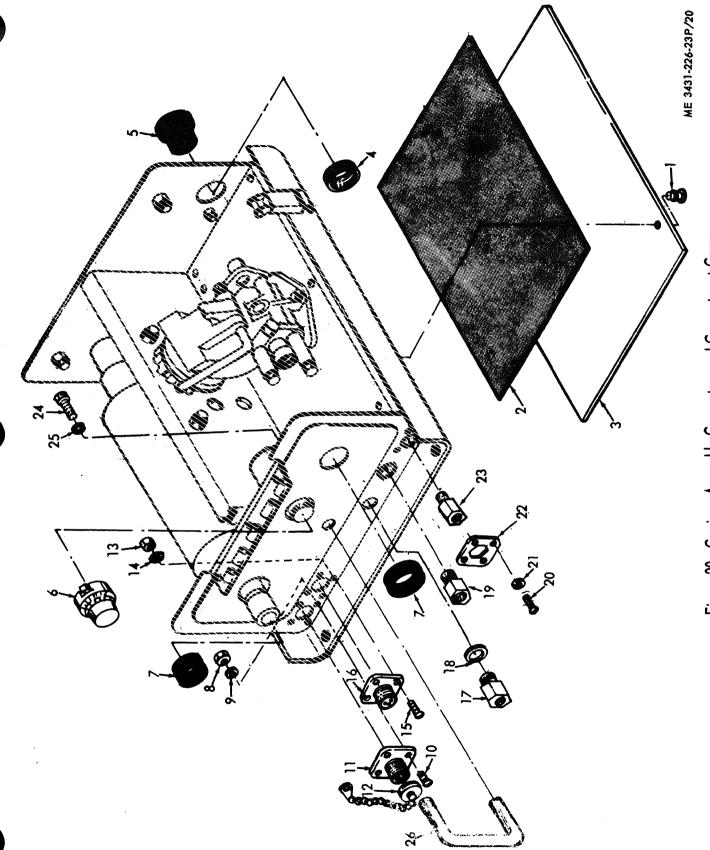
, Carriage Assembly Connectors and Compartment Cover.
